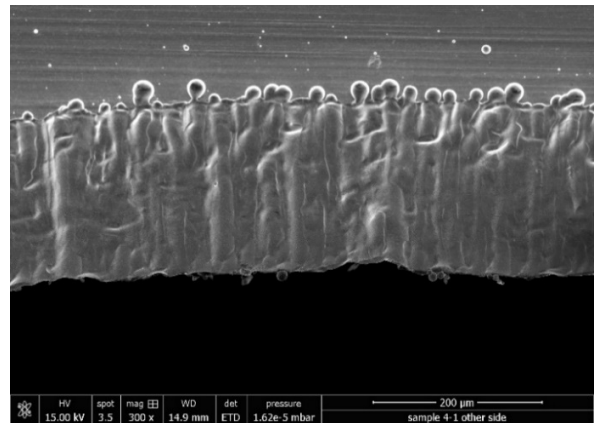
SEM detail picture of the cut zone of the lower surface (sample 1, test 4)
